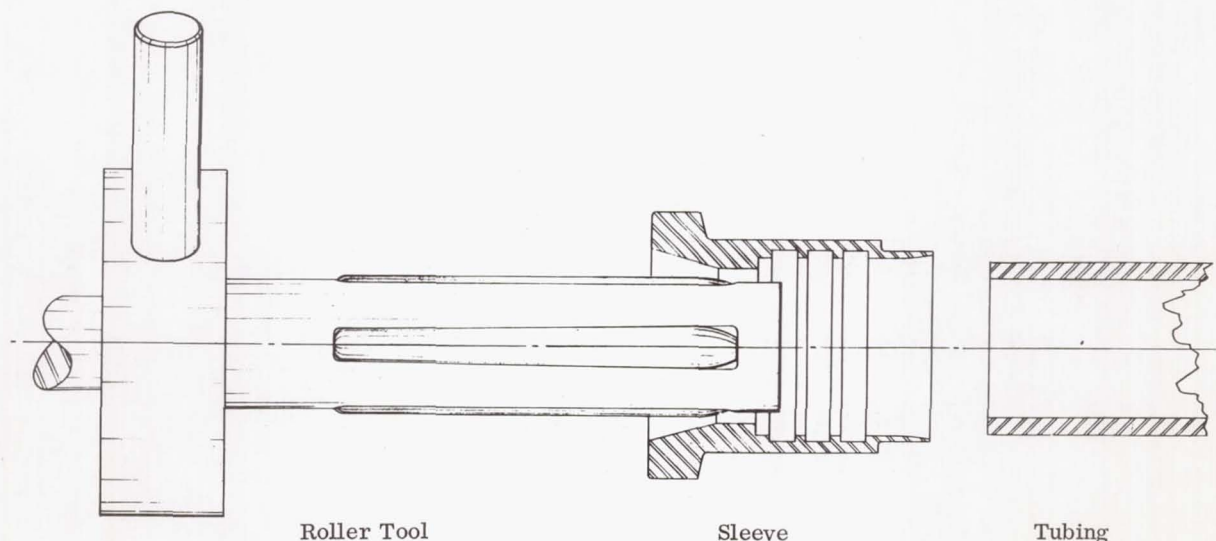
Tube - sleeve subassembly and roller swage tool
